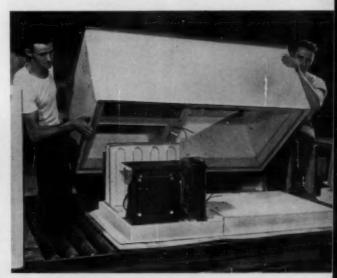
Assembled cabinet body, now permanently bonded into a single, sturdy unit, is removed from the positioning jig shown in Fig. 6 and placed over assembled back panel. The two elements are screwed together
